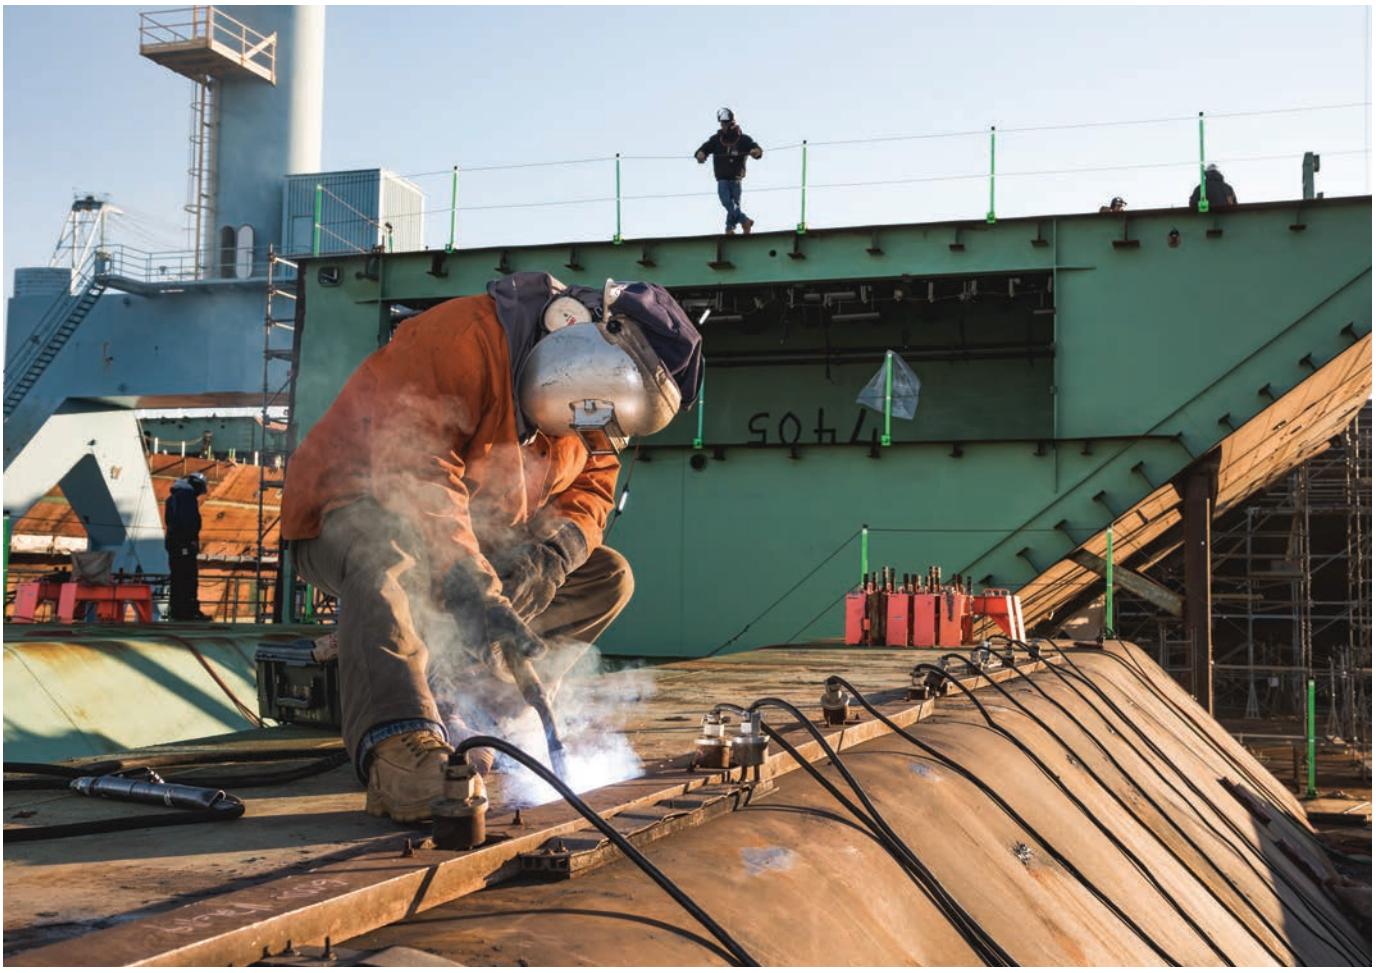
Douglas Rainey welds pieces of steel wearing the legacy welding PPE. (Photo by Matt Hildreth. Courtesy of Huntington Ingalls Industries.)
